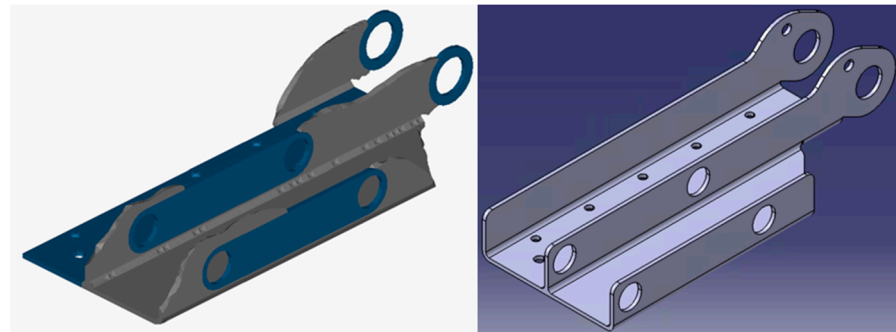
Left: Output geometry after topology optimisation; right: CAD model of final component.
